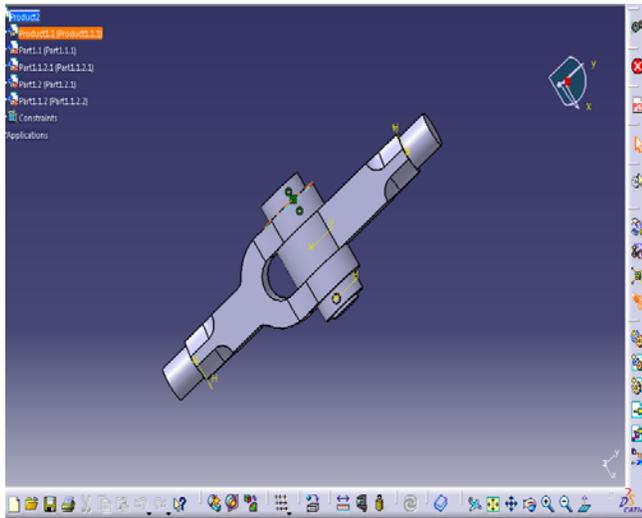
3-d CAD modelling and Assembly of the knuckle joint
